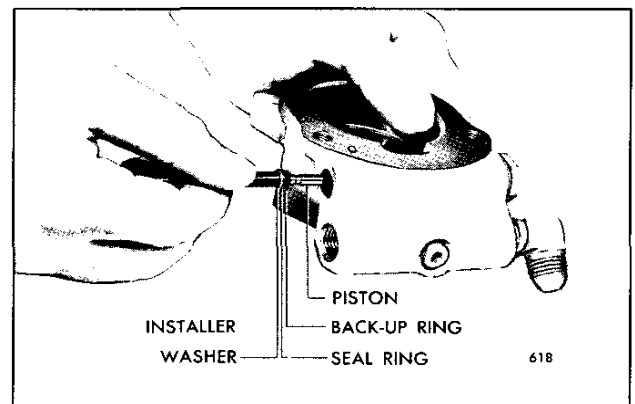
Installing Pressure Relief Piston, Back-Up Ring, Seal Ring and Washer in Pump Body with Installer J 7192
